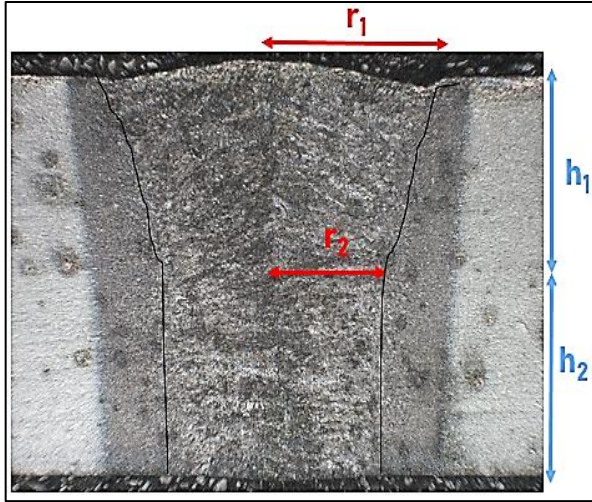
Macrograph with fusion line boundary (Laser welding)
